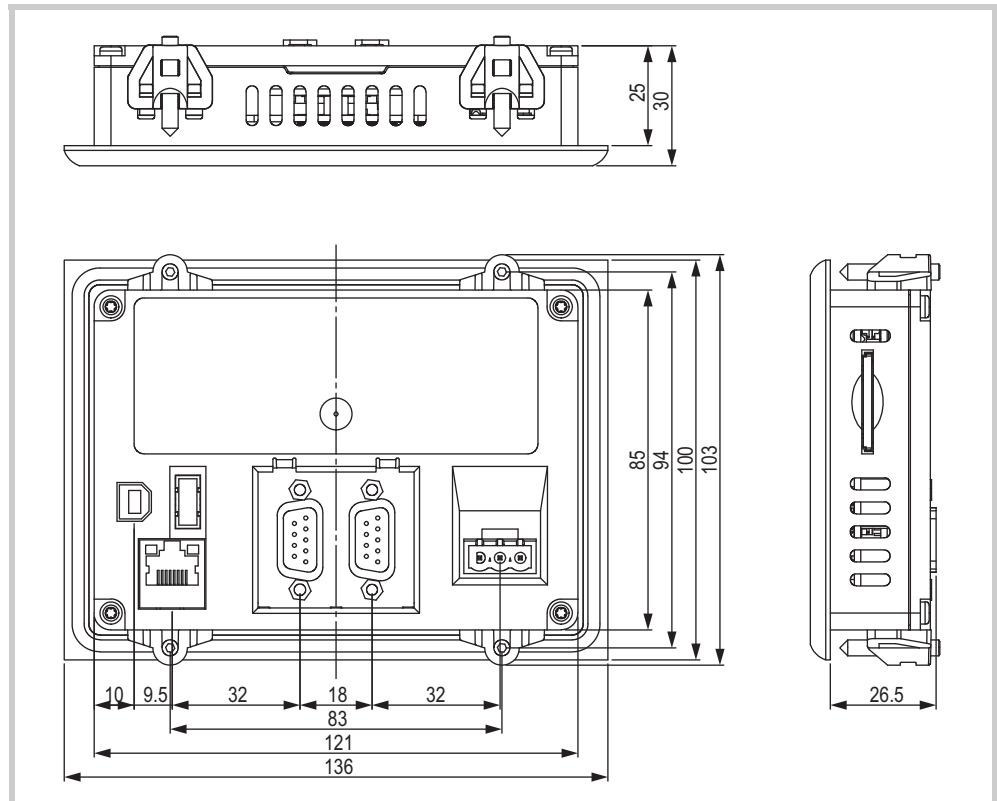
Mechanical dimensions of the 3.5" devices in mm
